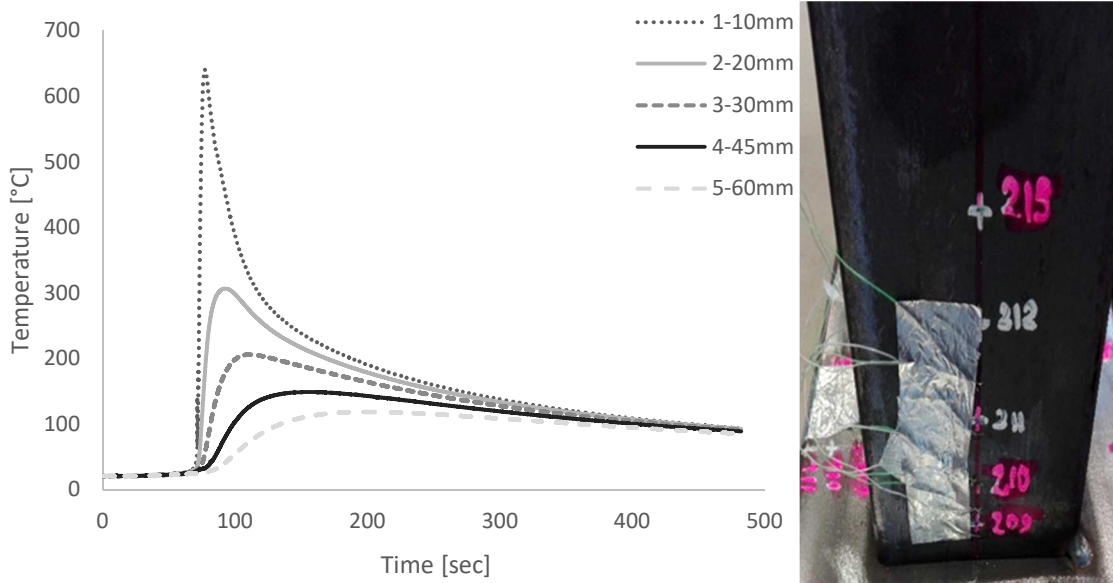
Progressive welding, thermocouples on SHS brace member.
